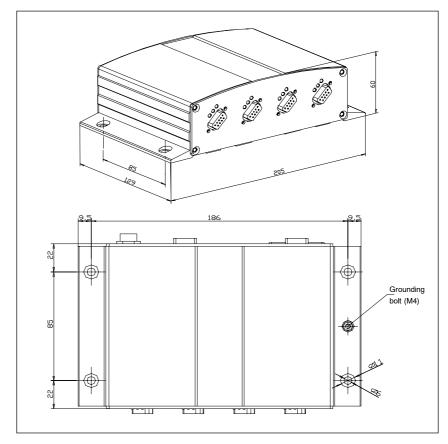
Dimensional drawing of the ASM 454/455/424
